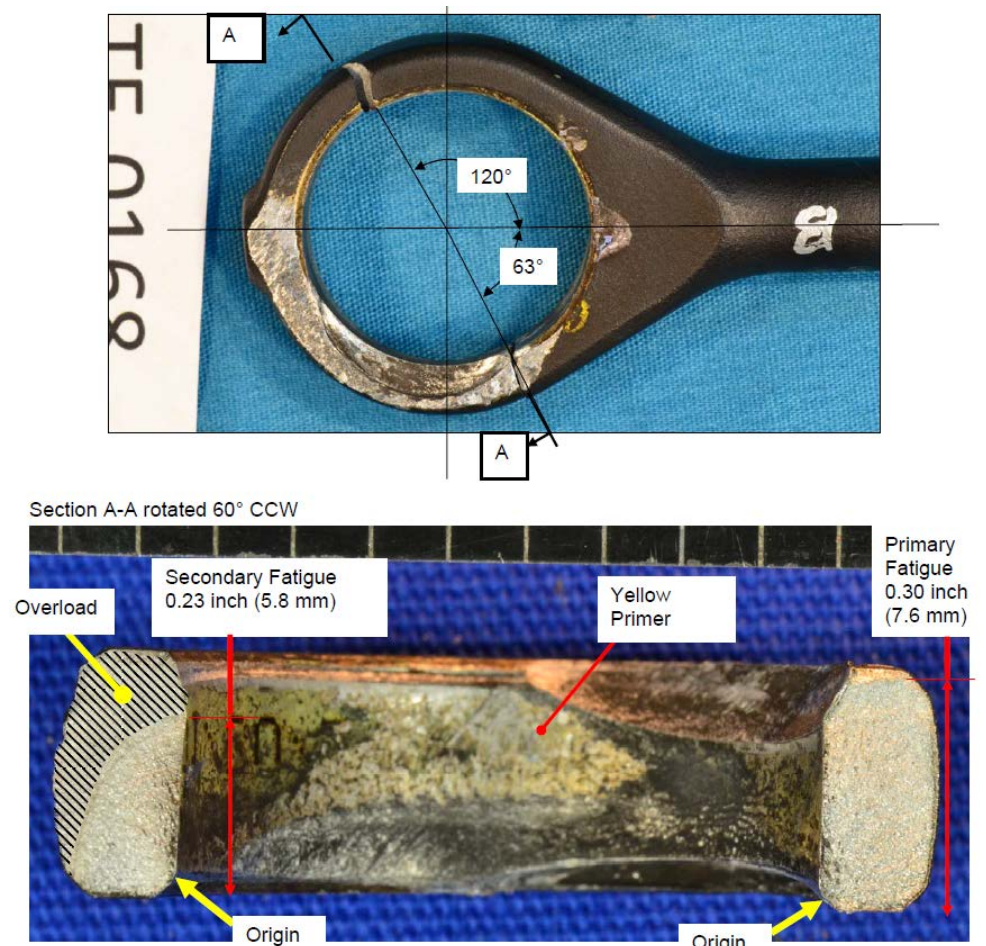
Cross-section view of the pitch horn-side circular end fracture of PCL S/N TE-0168. (photo courtesy of Bell Helicopter)
